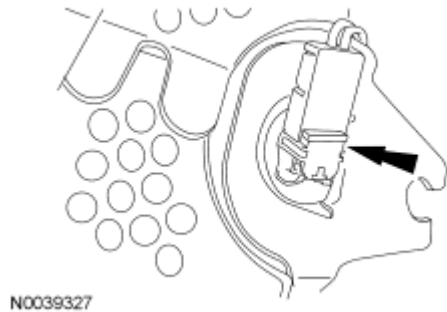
Locating Passenger Air Bag Module Electrical Connectors
